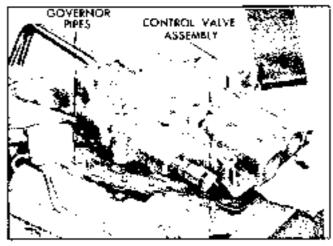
Removing Control Valve Assembly and Governor Piper Fion Cova
